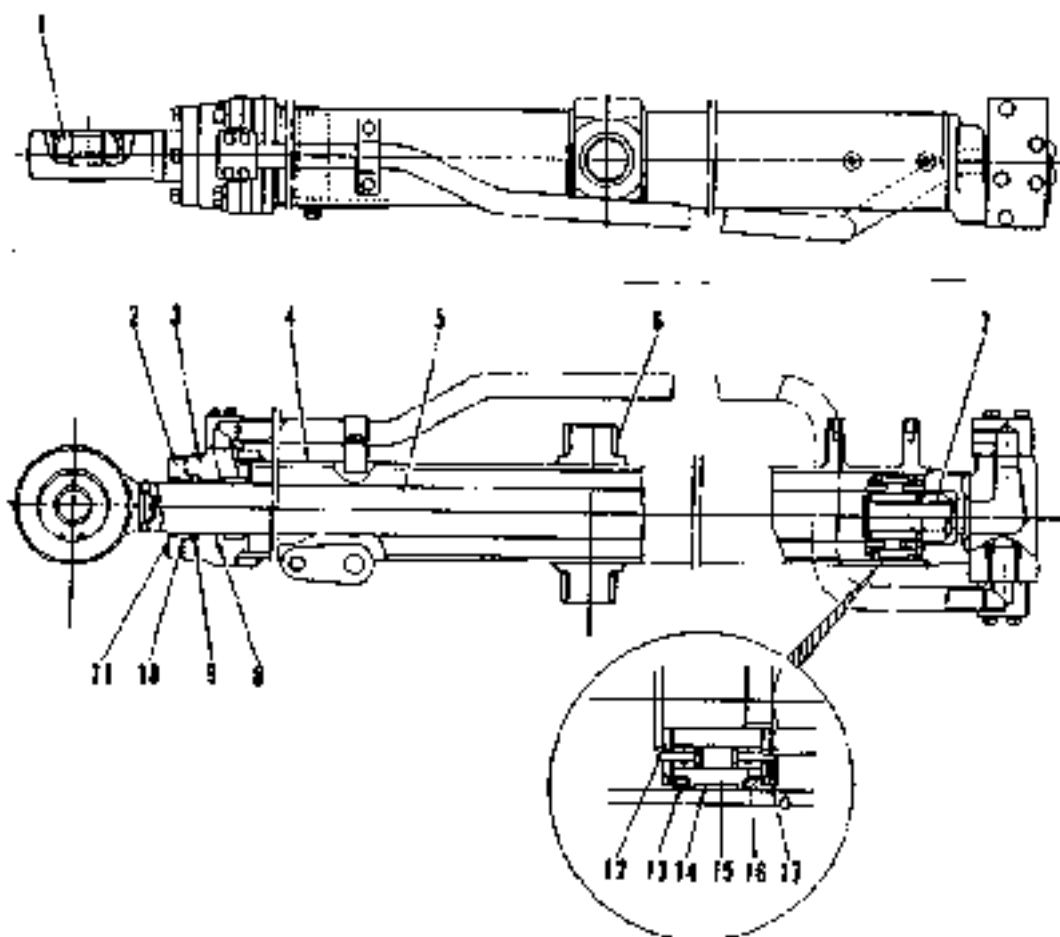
Blade cylinder (PD220Y-1, PD220YS)
